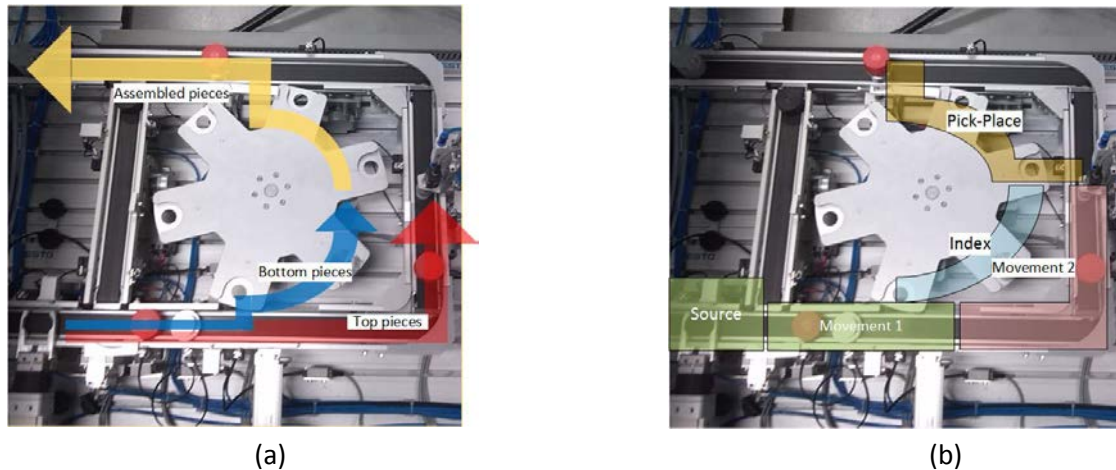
Assembly line of xCPS. (a) Bottom and top pieces are entered to the system on the conveyor belt at bottom left side of the picture. The assembled pieces output at top left side of the picture. The paths for bottom, top and assembled pieces are shown with blue, red and yellow arrows.
